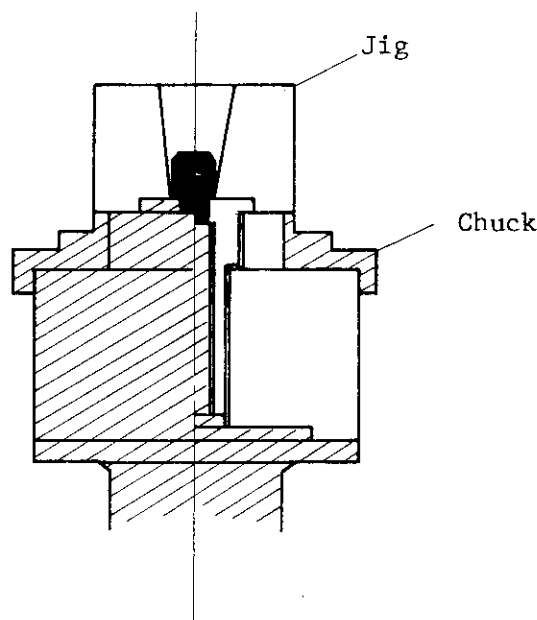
Jig for setting on the welding machine the  $^{170}\text{Tm}$  source inserted in the outer capsule
